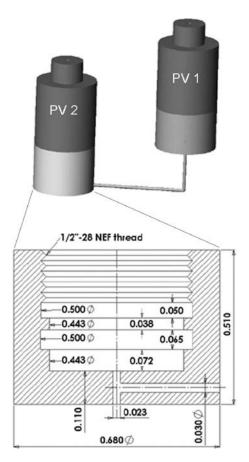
Schematic of late-mixing pulsed nozzle source and machine drawings of the custom pulsed valve faceplate.
